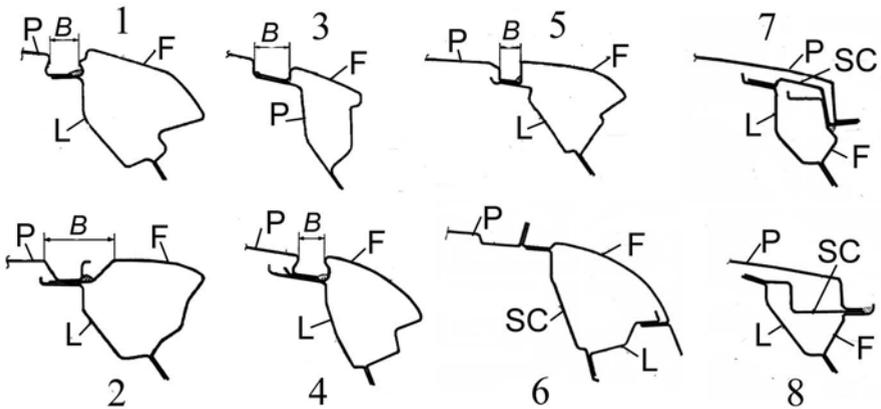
Examples of Y-Z sections of roof to body side junction. From 1 to 5: with drip mold housing; 1) $B = 16$ mm; 2) $B = 37$ mm; 3) $B = 22$ mm; 4) $B = 17$ mm; 5) $B = 13$ mm; 6: folded and roll welded flanges; 7 and 8: side welded drip and body side boxing.
